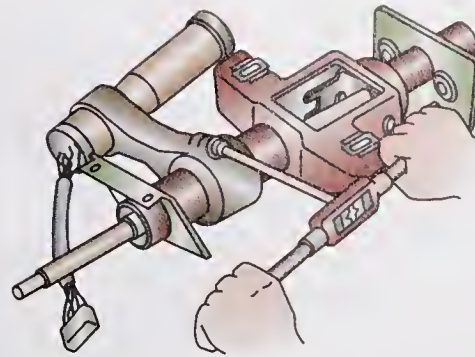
Removing tapered-head bolts with a screw extractor.
